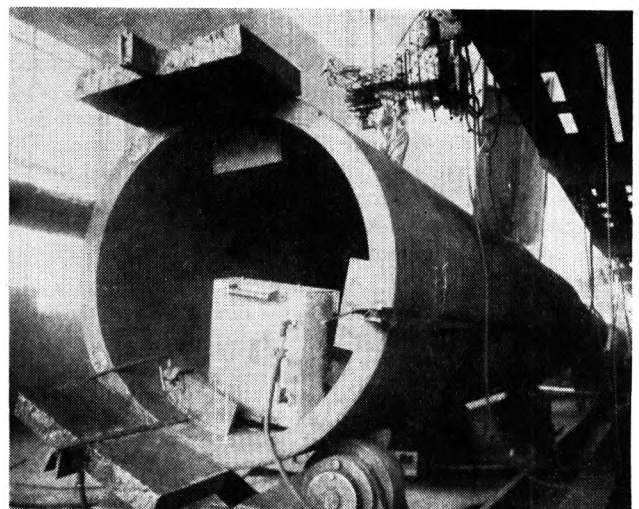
WELDED DRUM FOR HIGH-PRESSURE BOILER IN COURSE OF CONSTRUCTION
